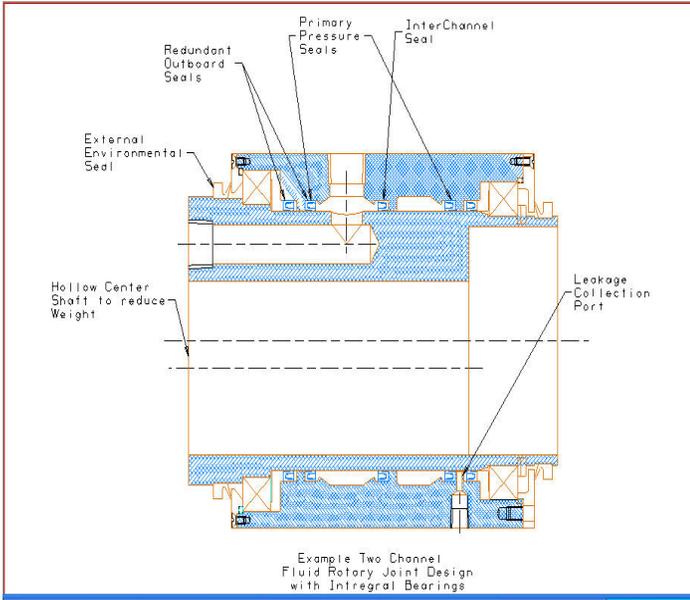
Fluid Rotary Joint with Standard Lip Seal Design
